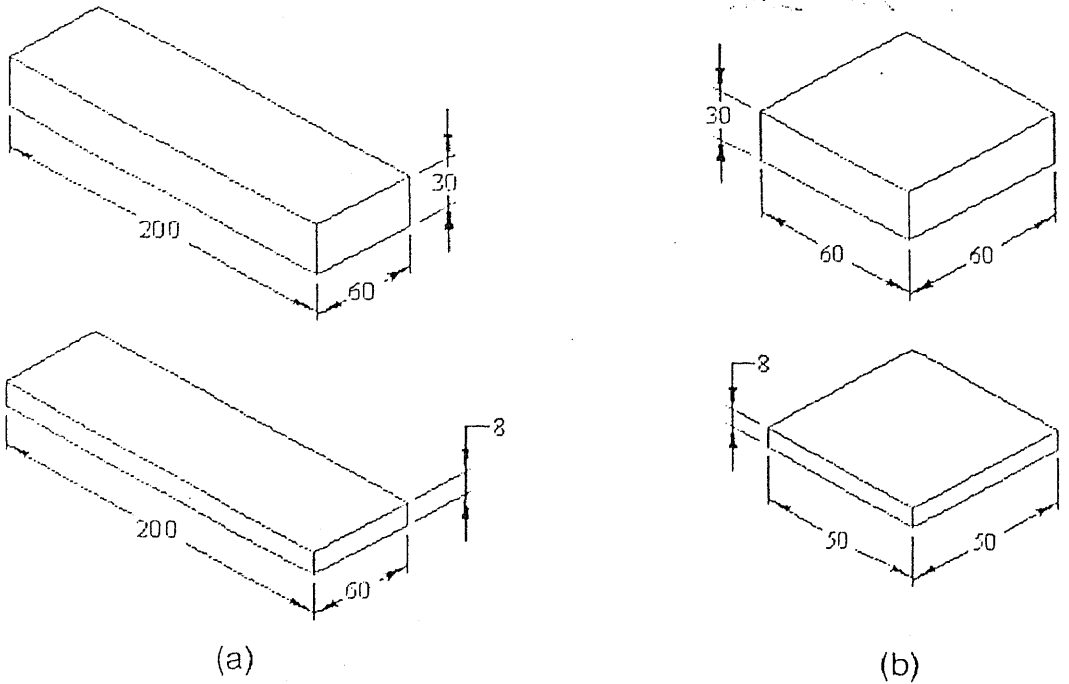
(a) Flexure test specimens and (b) edgewise compression test specimens.
